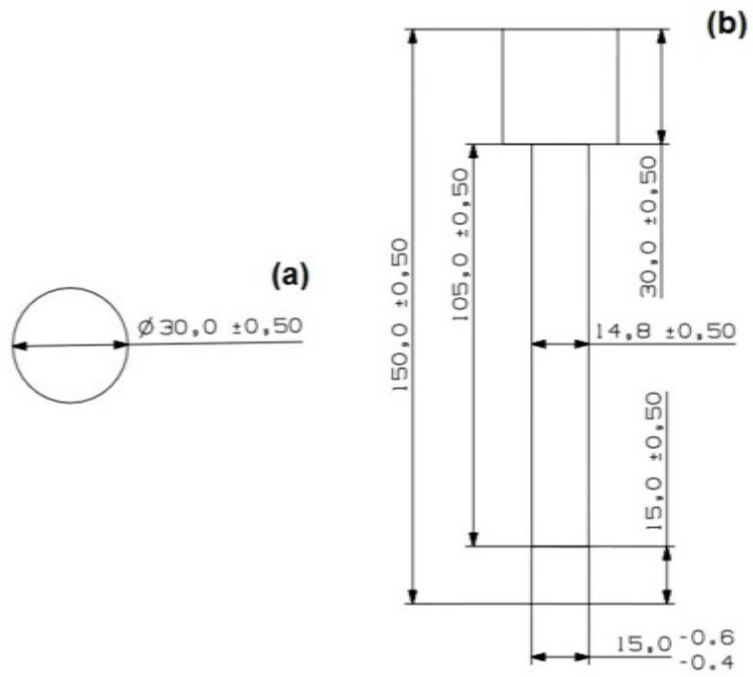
(a) The top view and (b) the front view of the plungers
